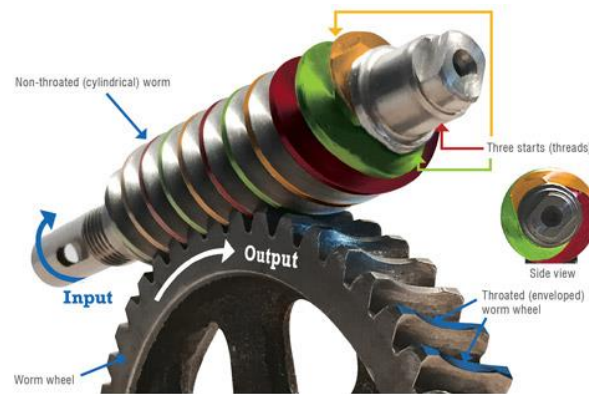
Single-enveloping worm gears (machinerylubrication.com)
